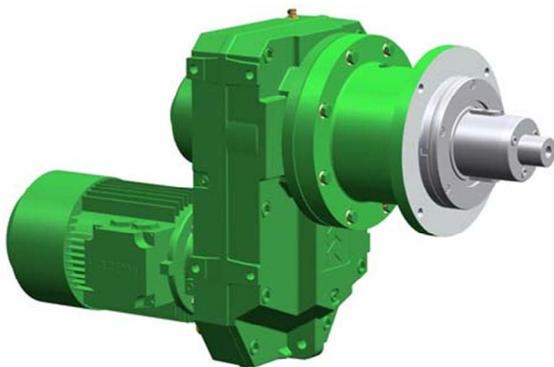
WATT shaft mounted geared motor AVS 85A 114ML4 TH with add-on bearing box
